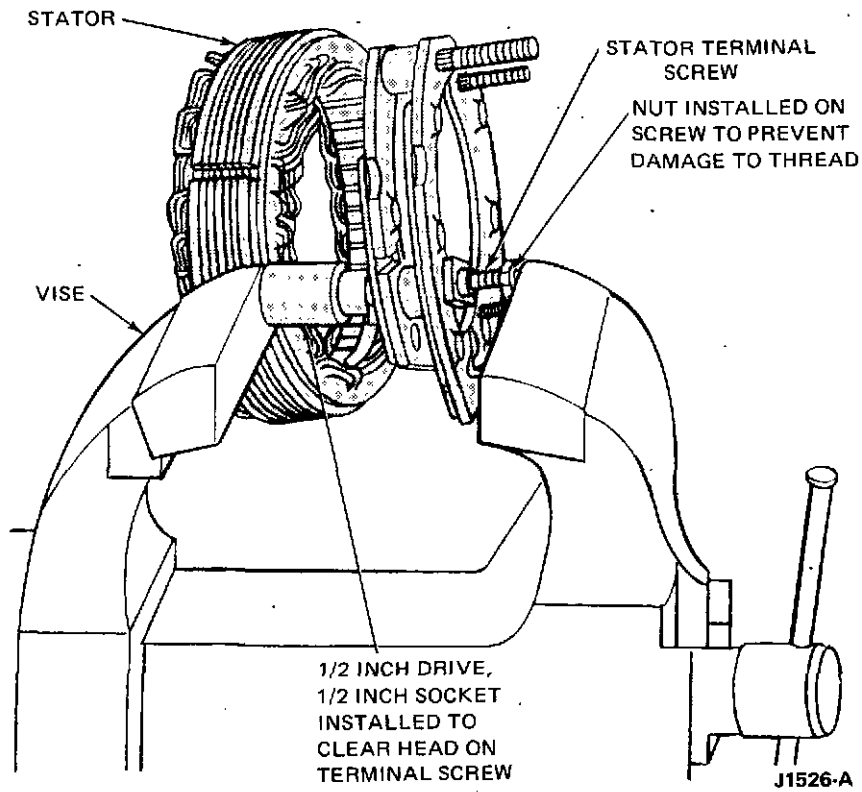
Stator Terminal Screw Removal 61-Ampere Alternator
